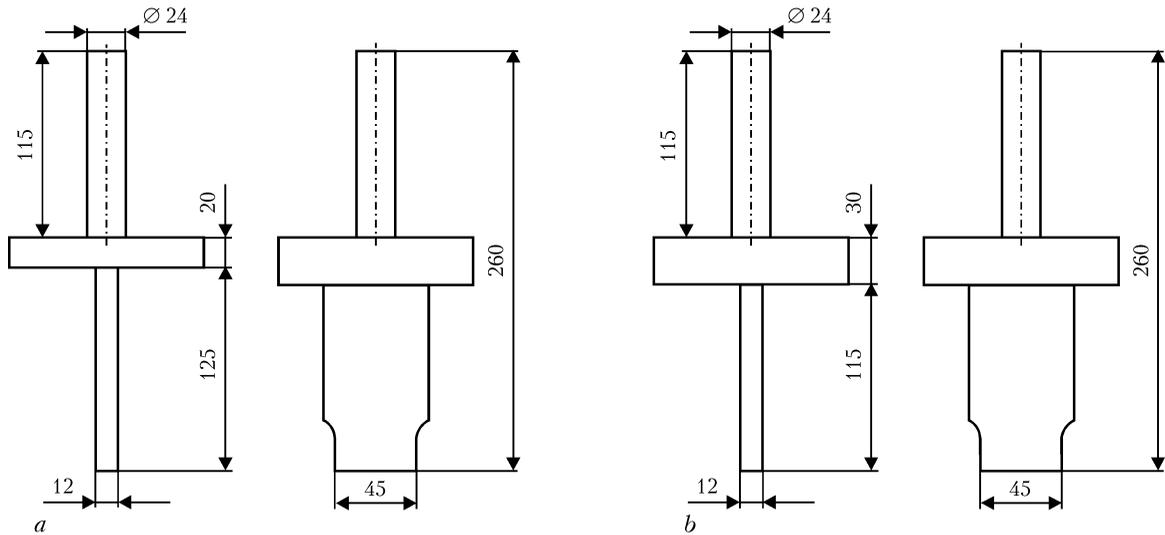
Drawing of mock-up specimen of welded joint of fastening stud of BFBD slabs to upper flange of T-girder from St3sp (a) and 09G2S (b) steels (second and third series of specimens, respectively)
